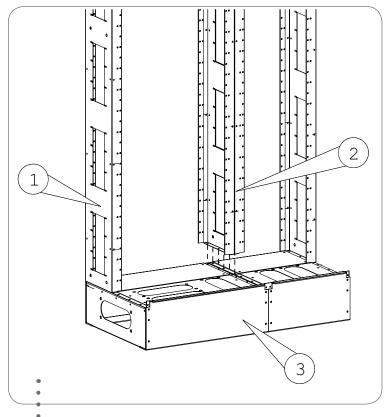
a) Fastening frame plates to the base of a 385 mm deep enclosure.
